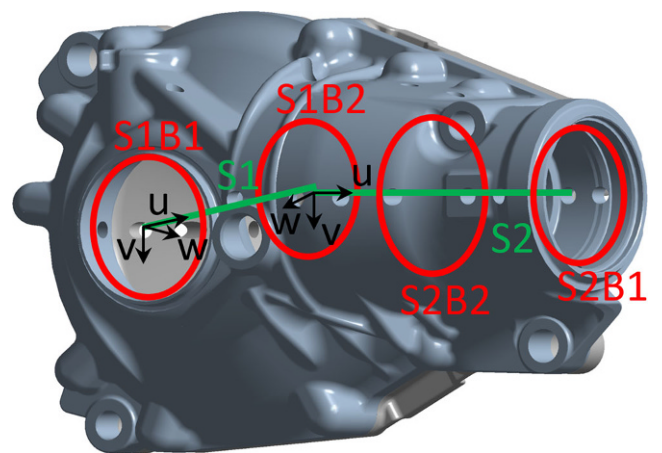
Labelling of the hypoid gear shaft (S1), the pinion shaft (S2), the bearings and the shaft coordinate systems
